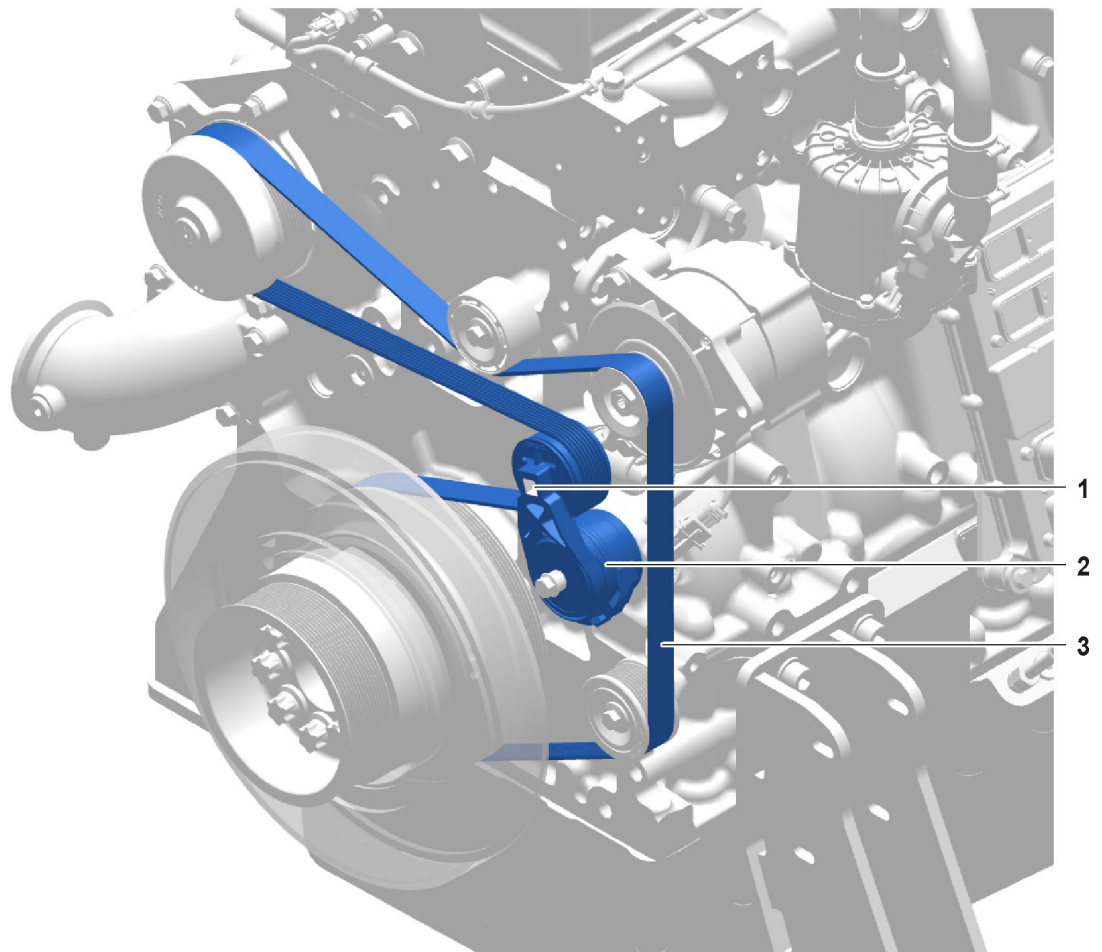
Installing the belt for the alternator for battery charging and coolant pump
